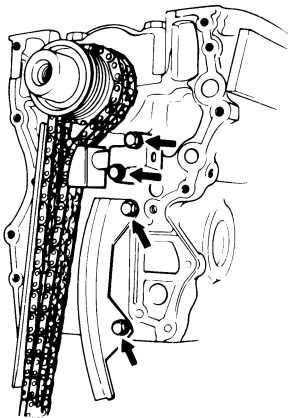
Removing Chain Tensioner and Timing Chain
